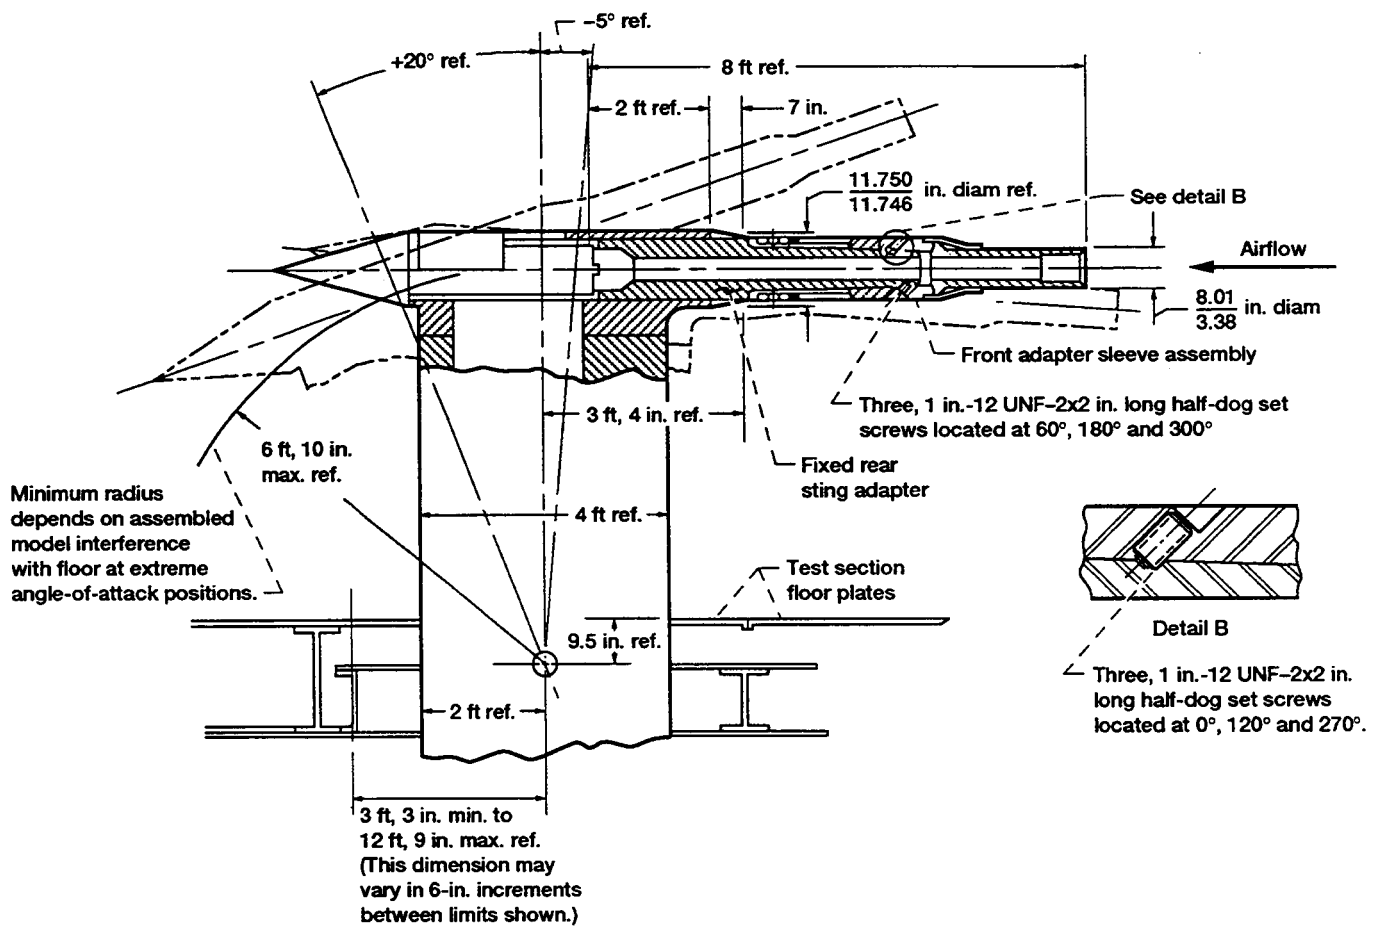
Rotating sting adapter. (The AFED project engineer can supply reference drawings 28013M40A100 through 28013M40A108 if requested.)
